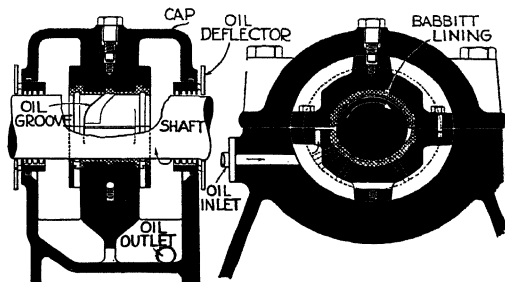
Main bearing used on a large circulation-oiled turbine. (Courtesy Socony-Vacuum Oil Co.)
